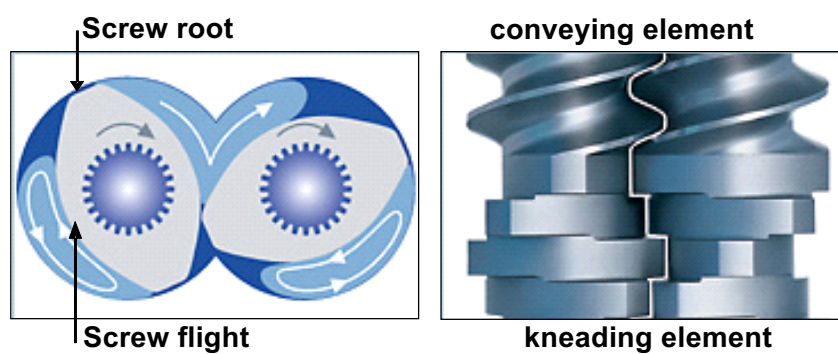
Schematic view of a co-rotating twin screw extruder (left) and kneading and conveying element (right)
